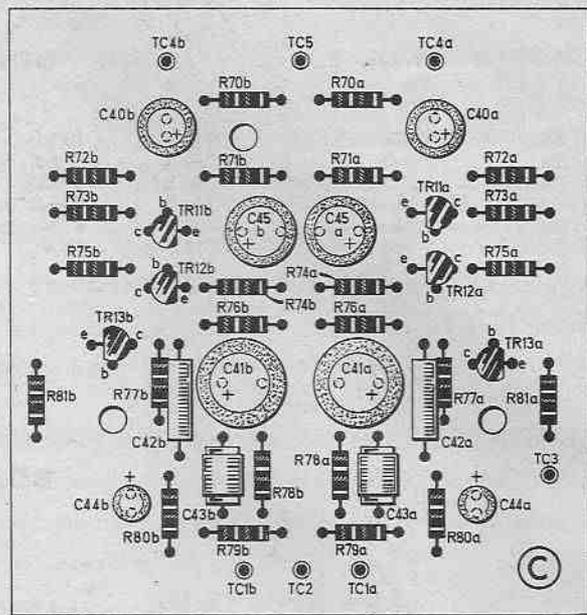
Board C of the 2020 Tuner Amplifier: top view showing components in position.
